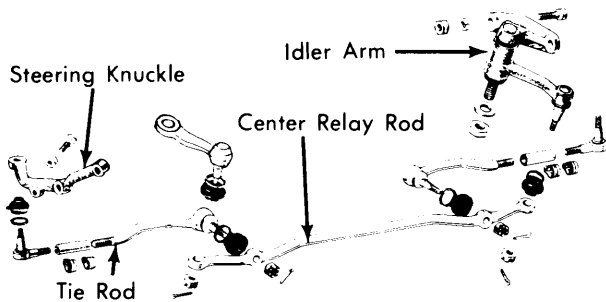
Toyota Steering Linkage with Bushings and Retainers (Typical Illustration)
